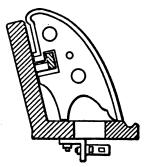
Sketch of Bridge Wall Segment (Wager Patent)
